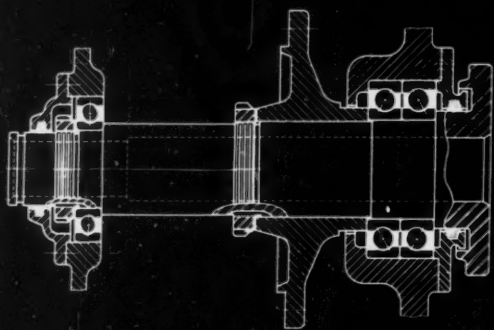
As the spindle is relatively short for its diameter, bearings need not be spread
